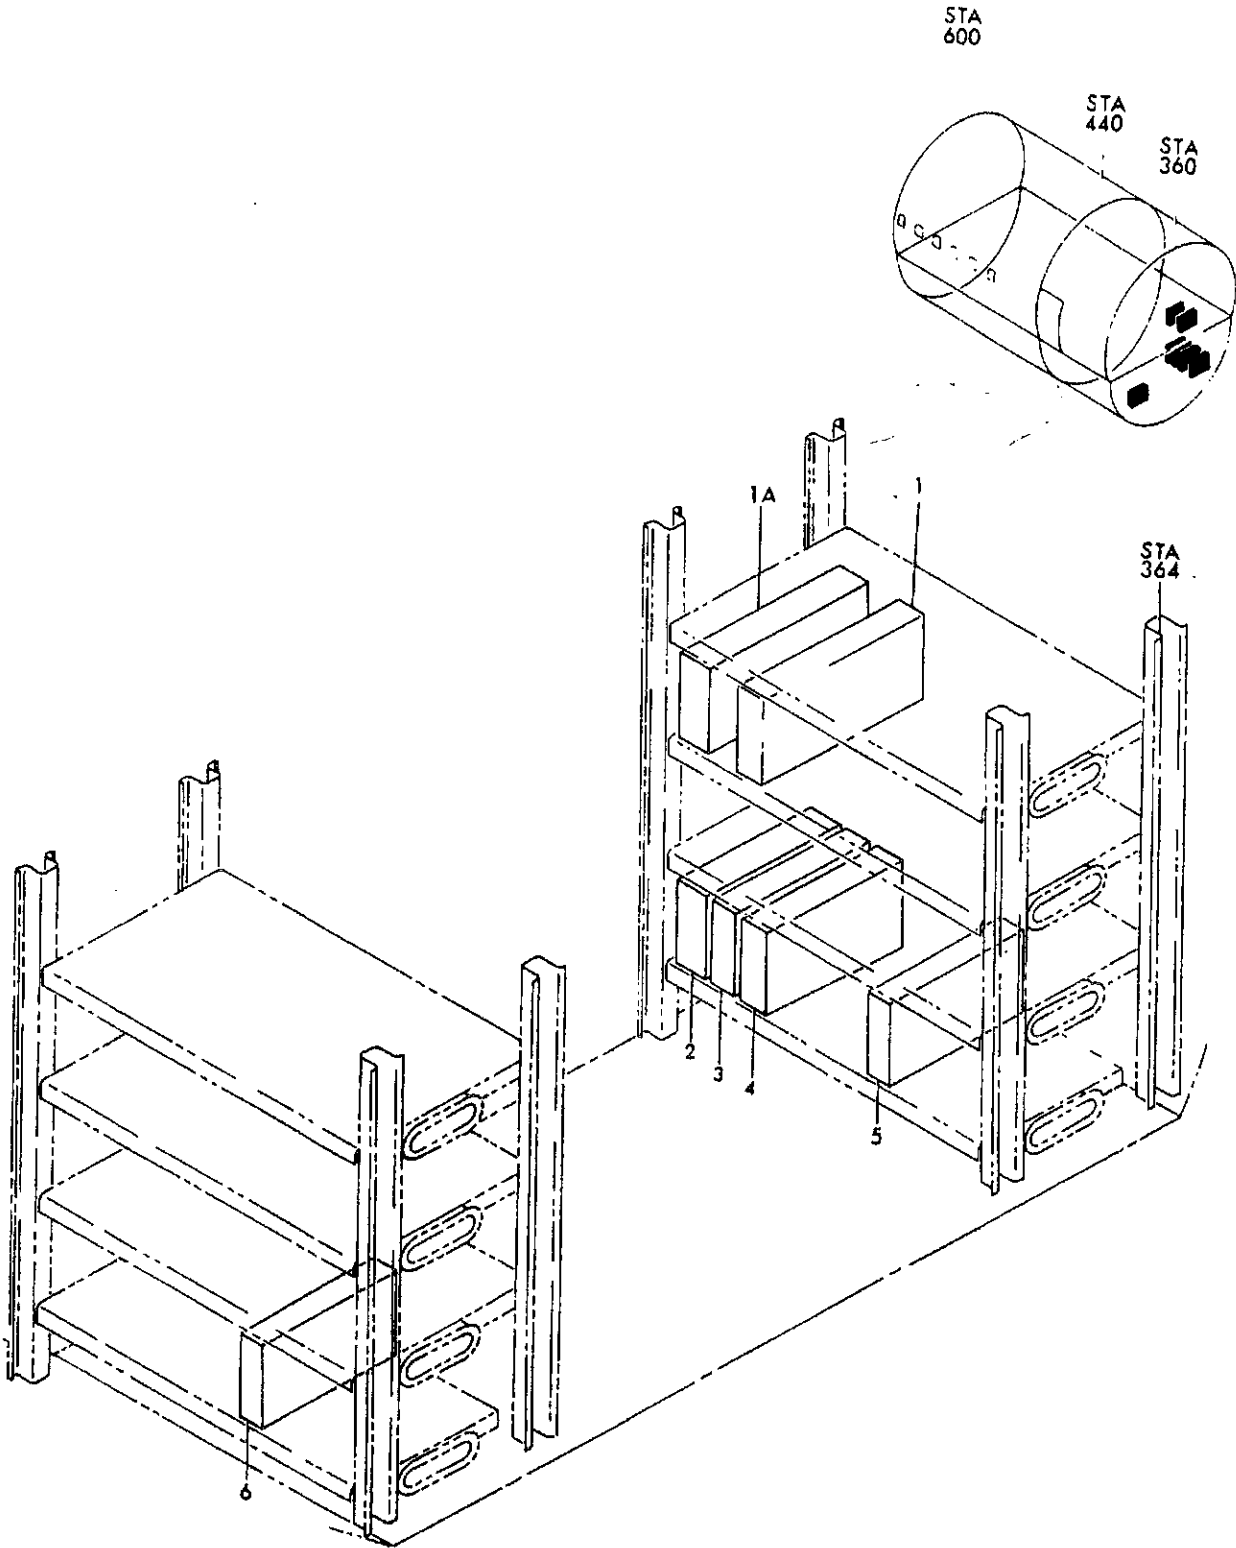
B. EQUIPMENT INSTL, RADIO RACK (ENGINE INDICATING ONLY)
